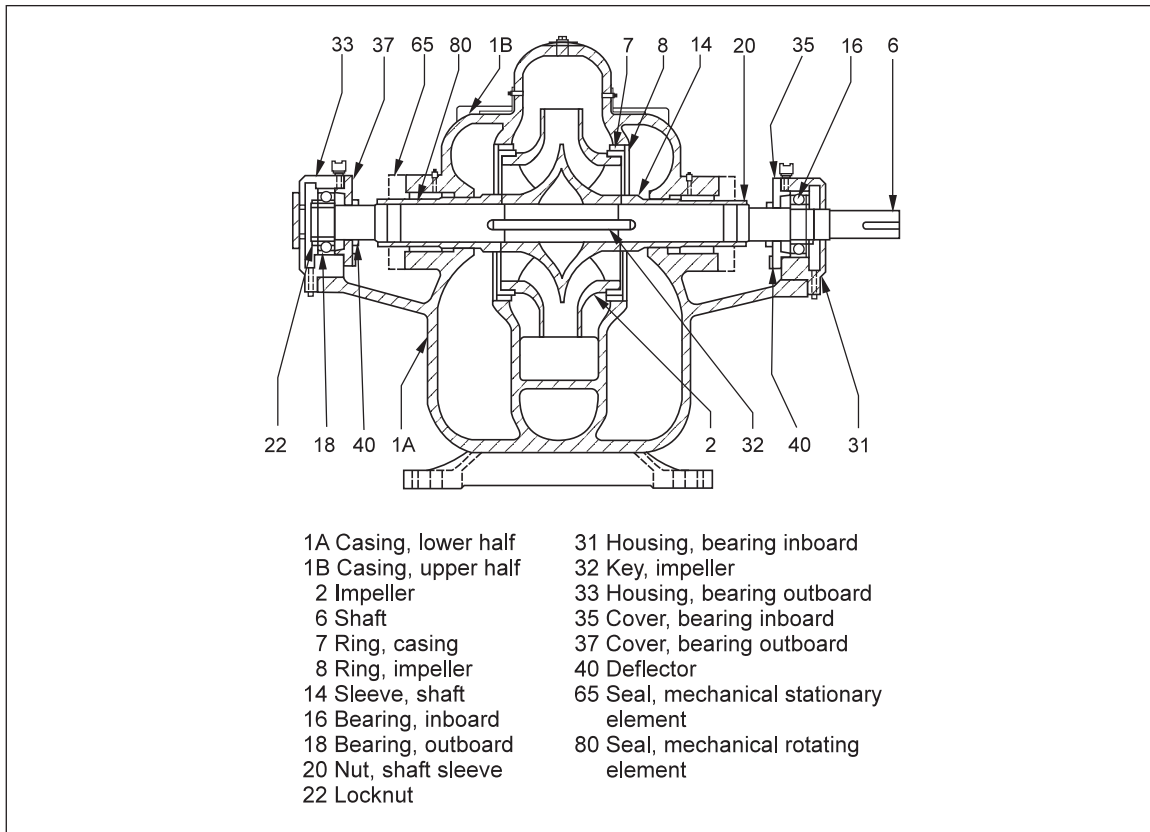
Cutaway drawing of a typical horizontal shaft split case pump
